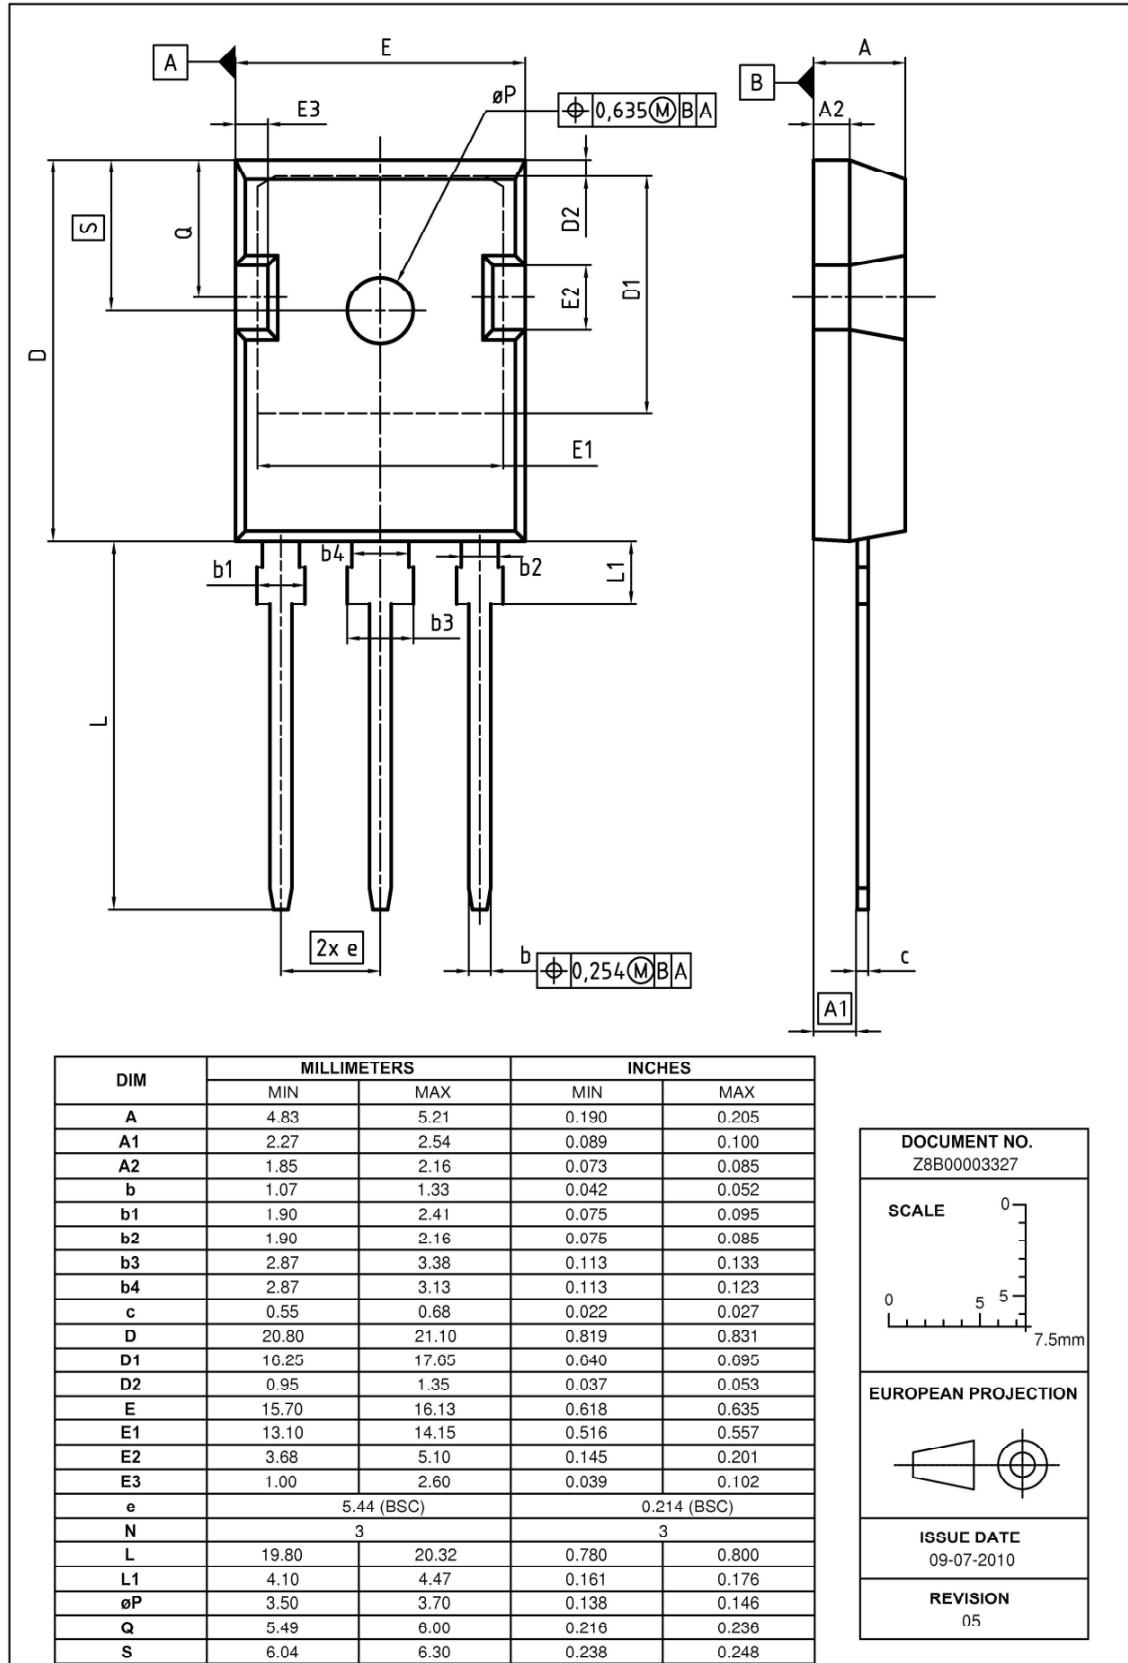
Outline PG-TO 247-3, dimensions in mm/inches
